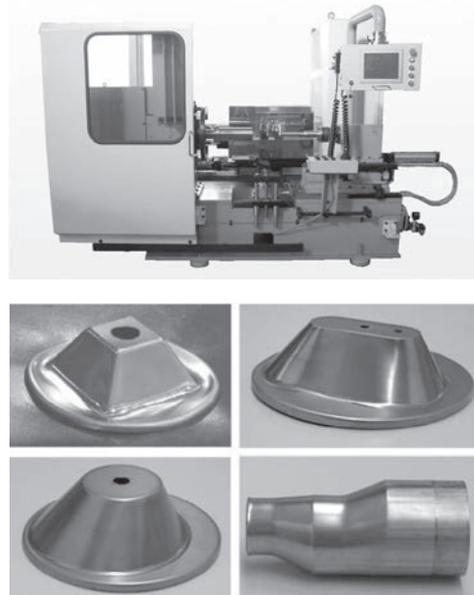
Prototype of practical spinning machine for non-circular shapes
